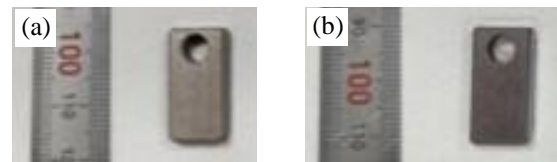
Cladded Type 316H stainless steel specimen; (a) Ni cladding, (b) Inconel 625 cladding.
